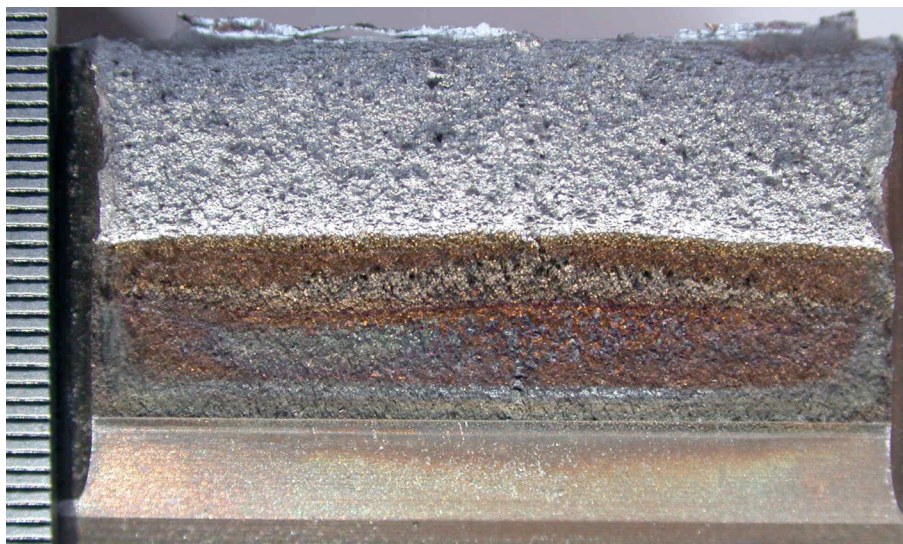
Photograph of the fracture surface of Alloy 600 specimen CT31-04.
